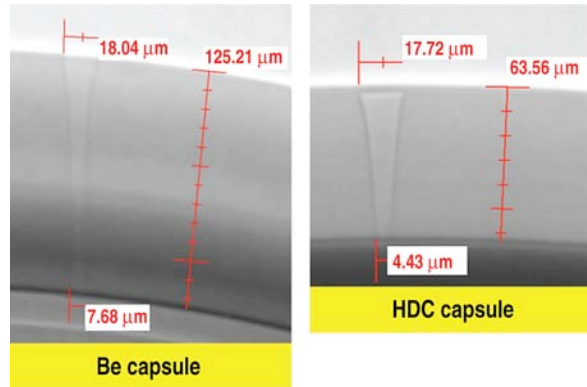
Funnel-shaped tubes in both Be and HDC capsules.
